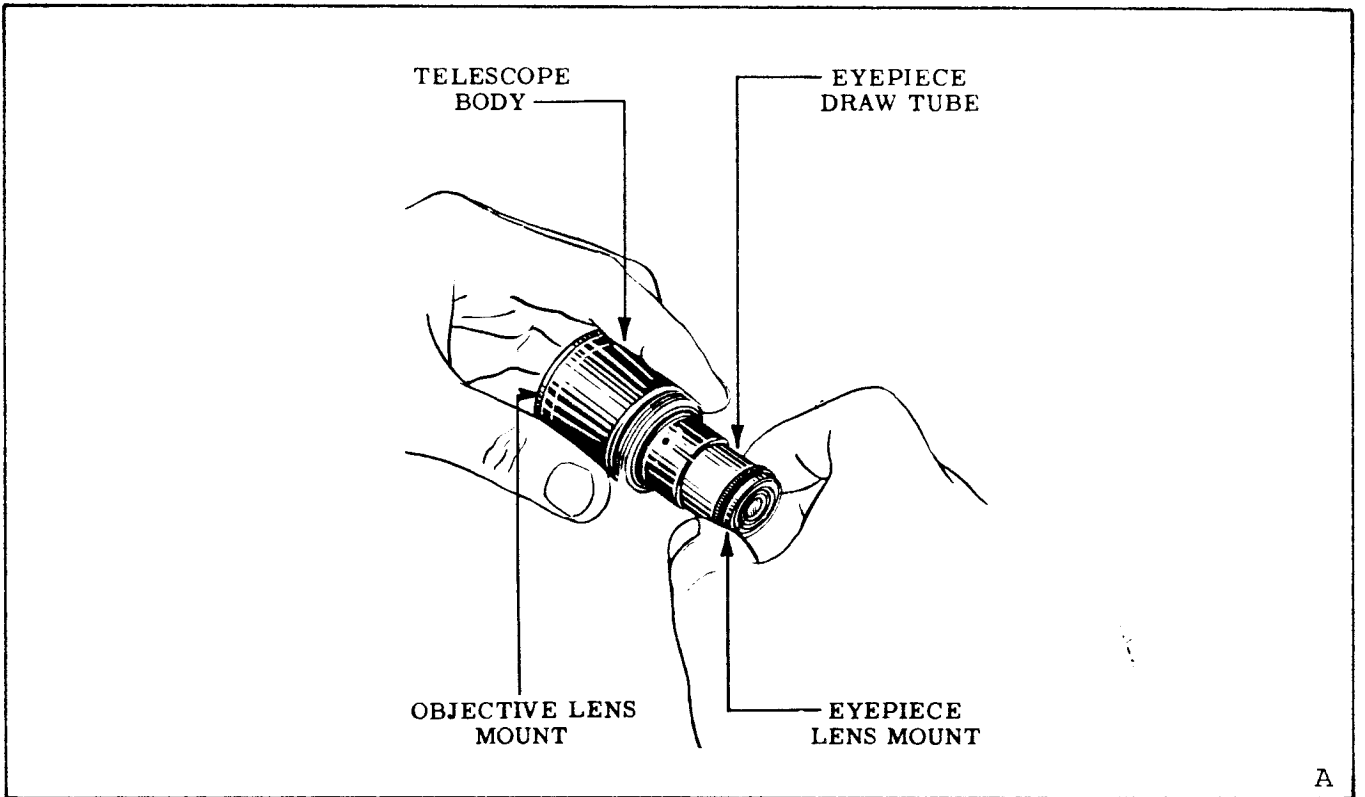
Stadimeter Telescope Assembly Disassembly Operations (Sheet 1 of 2)
